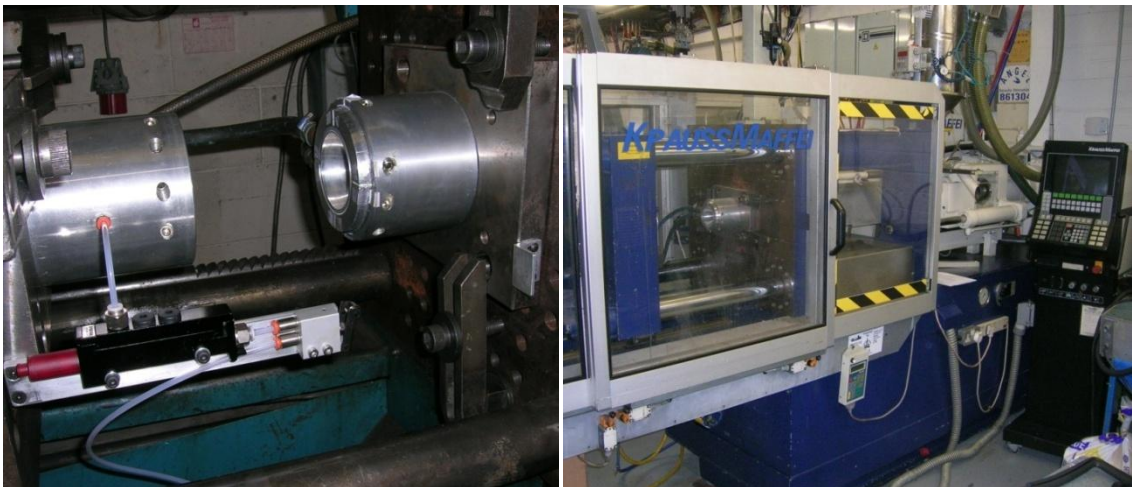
Injection moulding production (a) loaded mould tool, (b) injection moulding machine
